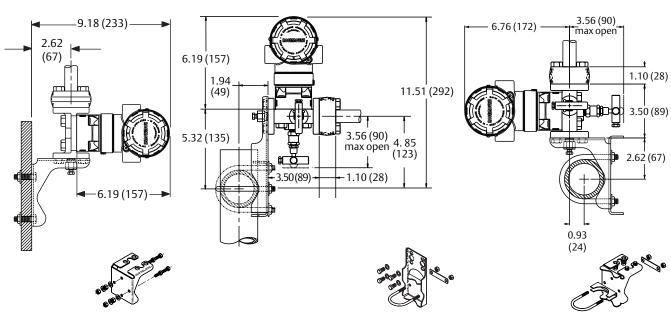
Rosemount 2051C Coplanar with Traditional Flange
